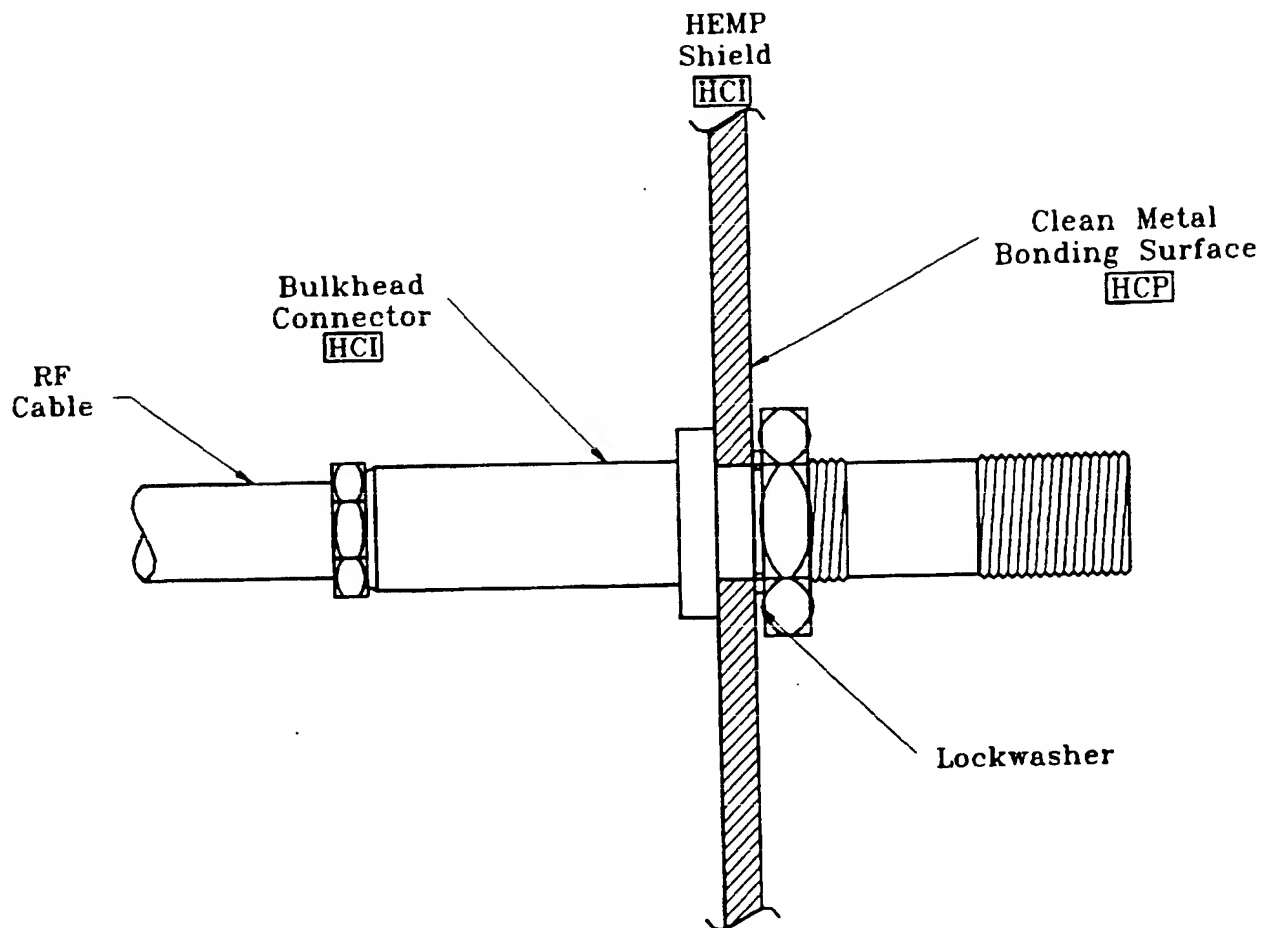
Bulkhead connector for bonding cable shield to shield.
